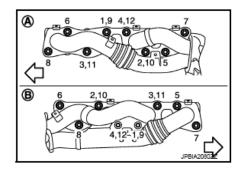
Exhaust Manifold Mounting Bolts Loosening Order (Bank 1 And 2) Courtesy of NISSAN MOTOR CO., U.S.A.
